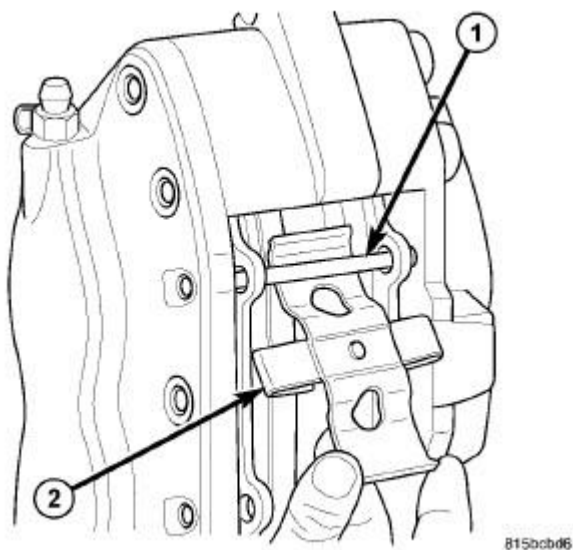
REMOVING/INSTALLING SPRING CLIP
